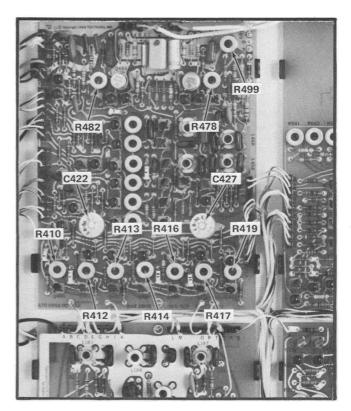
Bar Drive and Video Out board adjustment locations.
